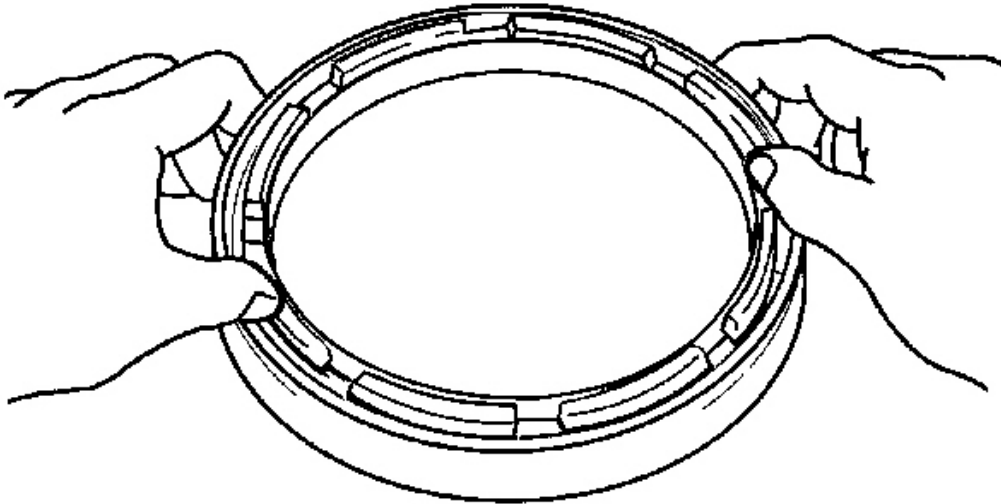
2nd Brake Piston & 2nd Brake Clutch Cylinder
